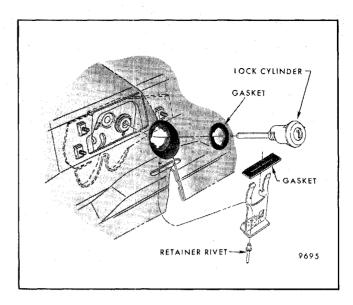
Typical Bottom Loading Lock Cylinder Retainer
